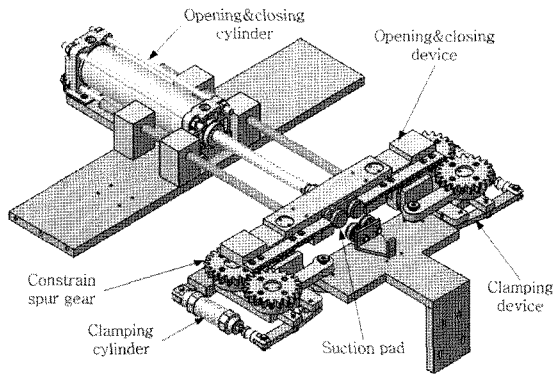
Composition and CAD model of clamping and opening-closing mechanism
